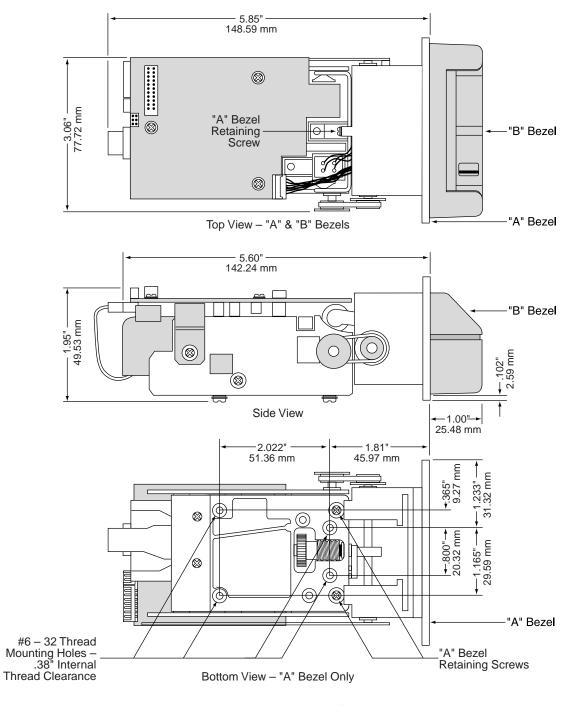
"B" Bezel Mounting - Top, Side, and Bottom Views
